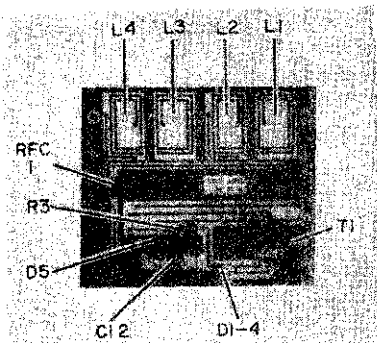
POWER SUPPLY parts in position on the main circuit board.
